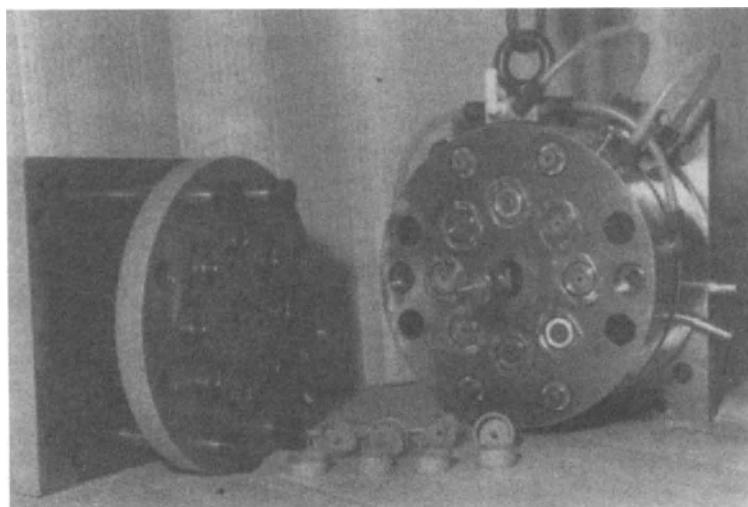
Cap-unscrewing mold that has a rotating action for removal of molded caps. When the mold opens, the pin extending to the right side of the mold follows a guide plate and provides the rotating action for ejection.
